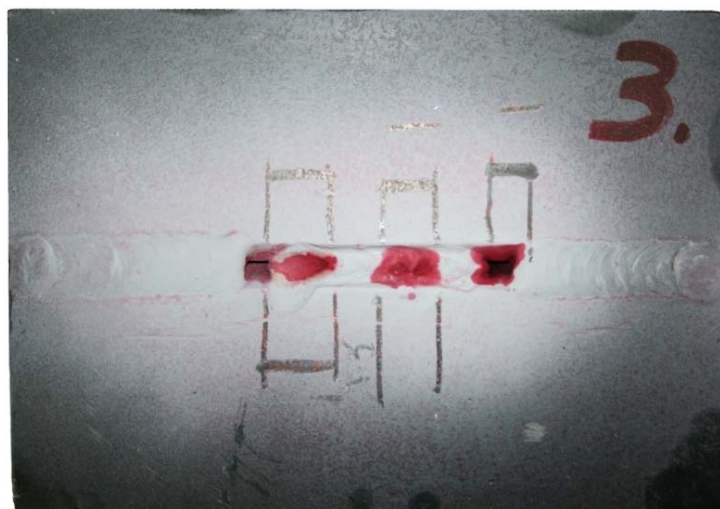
Sample W3 - welded in the water environment after the penetration test. Cracks in weld axis
